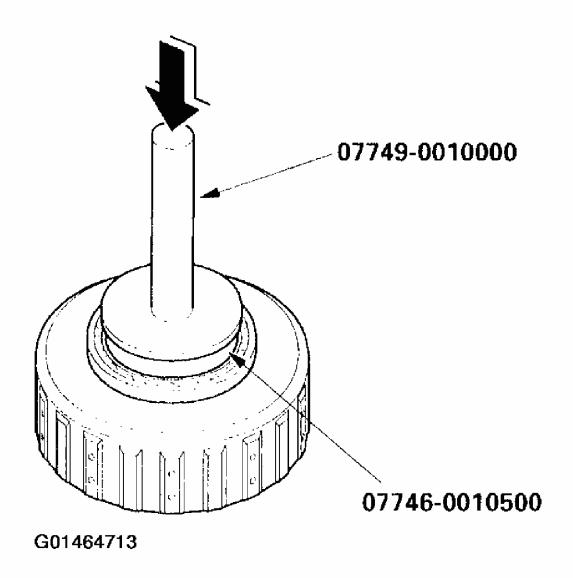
Installing The Bearing On The 3rd Clutch Courtesy of AMERICAN HONDA MOTOR CO., INC.
